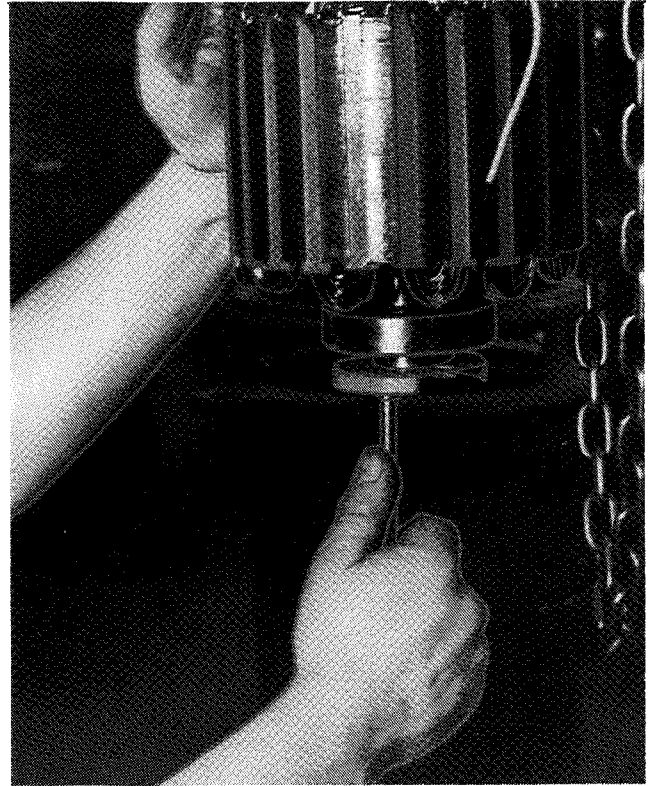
Mounting Photo Transistor Board and Actuator Cup
